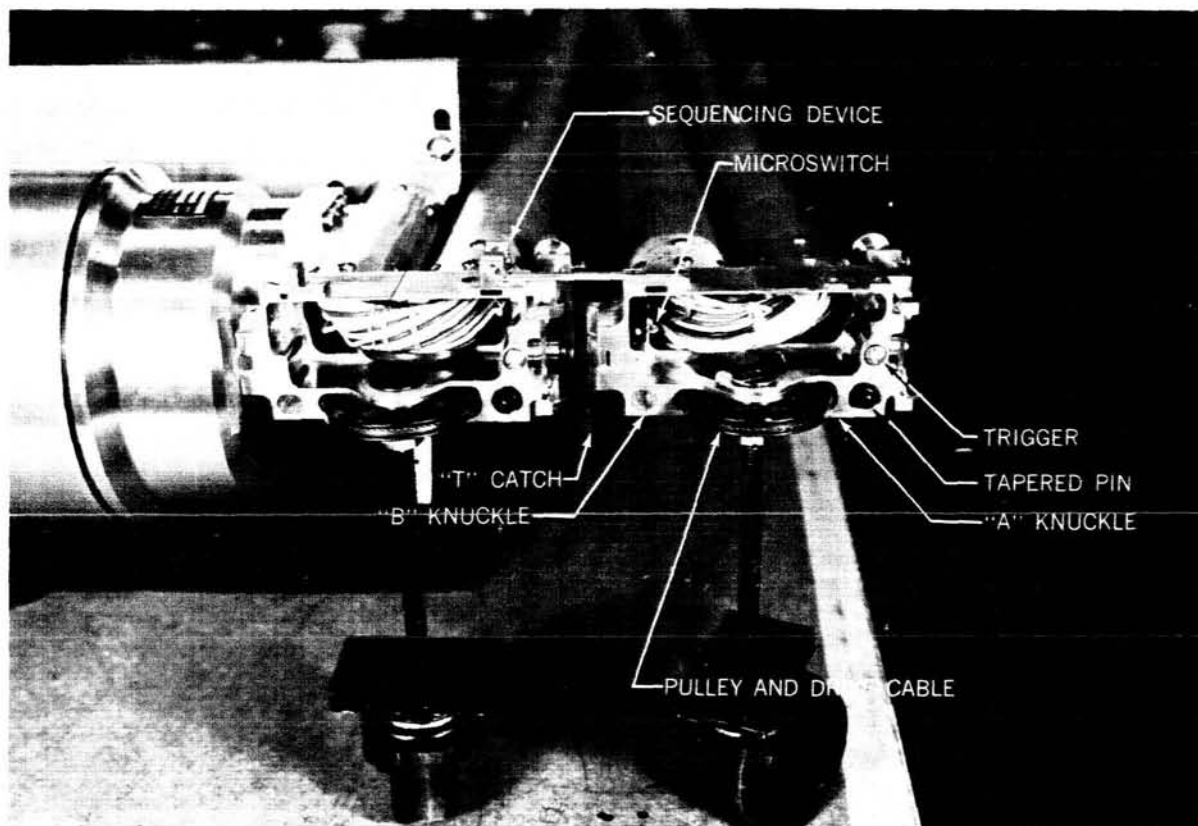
Details of the triggered knuckle lock and internal passage of the electrical cable.
